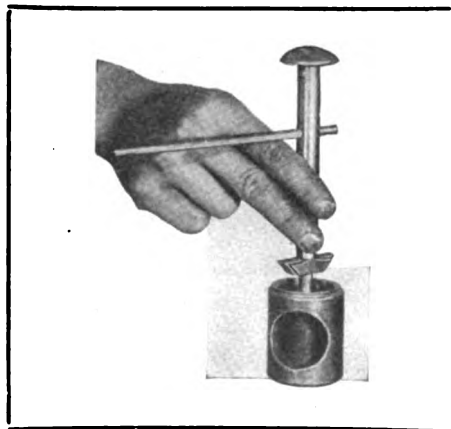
One View of Tool Used for Re-Cutting the Seat.
